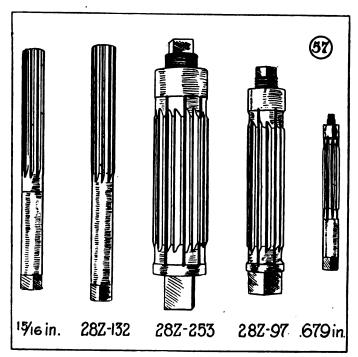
Reamers used in overhauling transmission. 28Z-97, slow speed gear bushing reamer; 28Z-253, reverse gear bushing reamer; 28Z-132, driven gear sleeve bushing reamer; 15/16-in. transmission driving plate bushing reamer; .679-in. Planet gear bushing reamer
